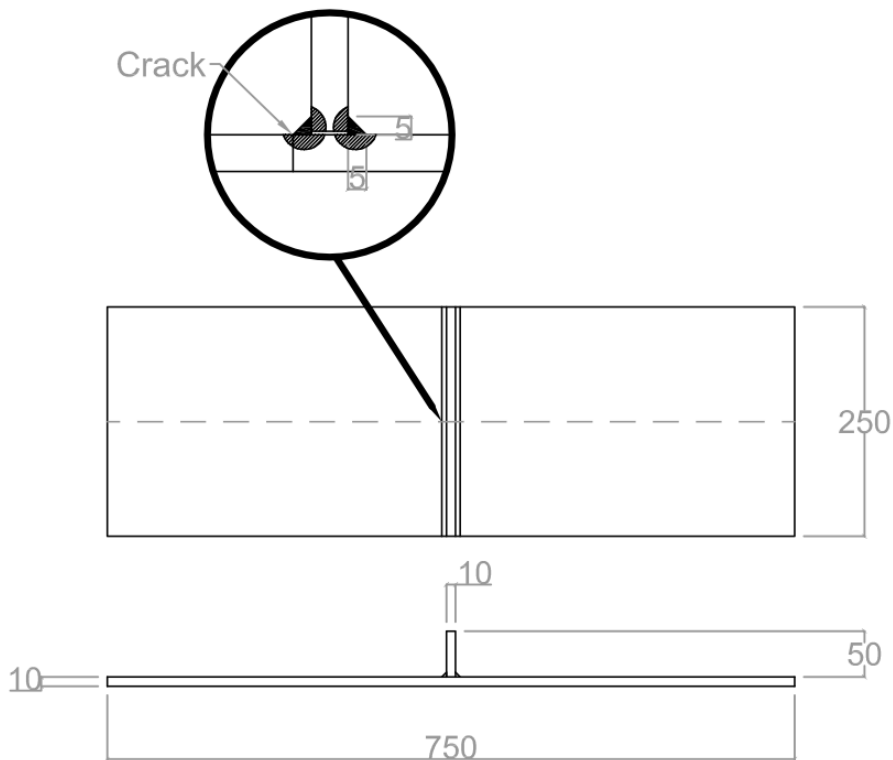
Geometry of the T-joint numerical model with double sided fillet weld
